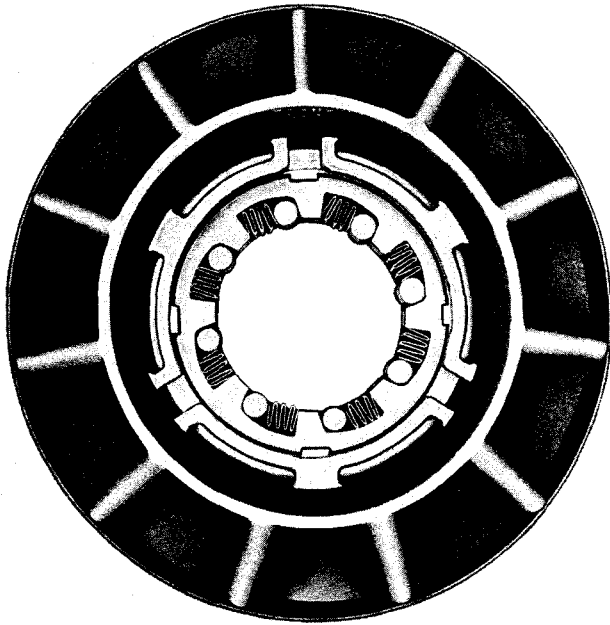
Model TC 240 stator with cam, rollers and springs
